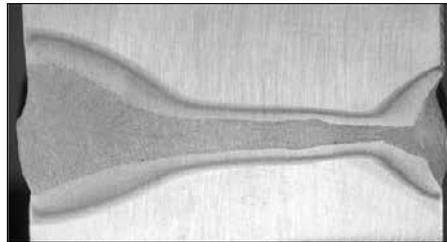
Single-pass laser-MAG hybrid welding of 30 mm high-strength steel (RQT701) with dual-MAG technology. Laser power 19.8 kW, 0.8 m/min
